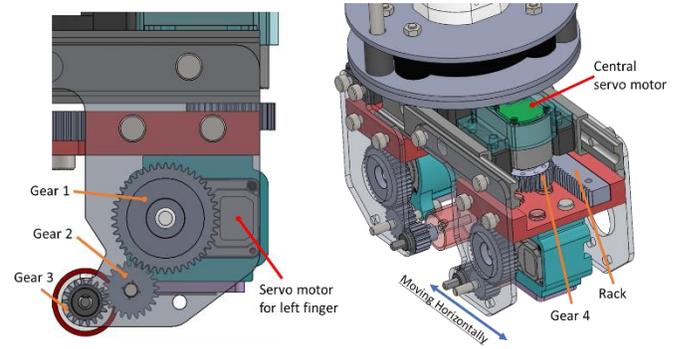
Left finger part. Left panel shows gear placement and right panel shows rack structure.
